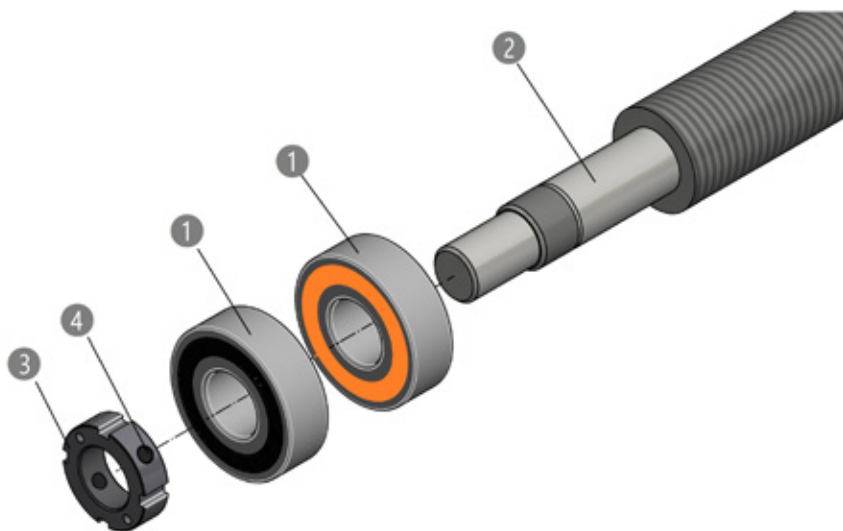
Assembly of axial angular contact ball bearings type BST
